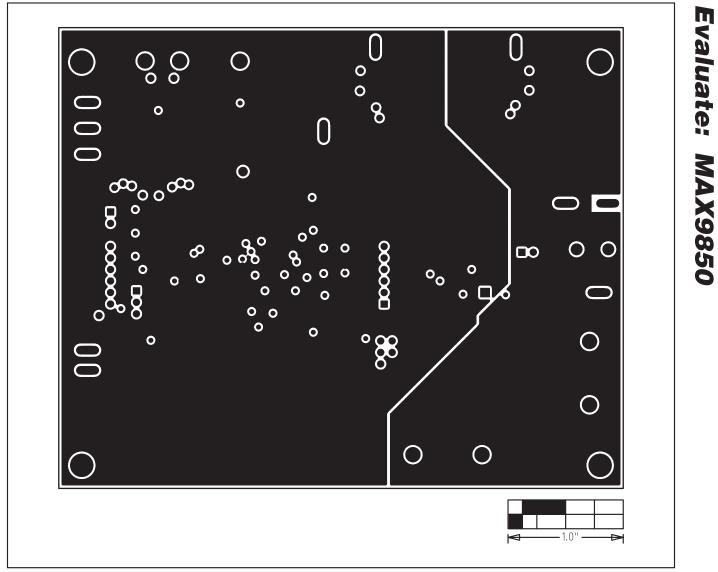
MAX9850 EV Kit PCB Layout—Inner Layer 2
